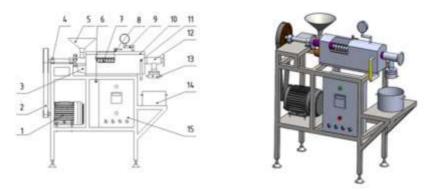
Schematic diagram of the proposed machine 1-Electric motor, 2-Belt drive, 3-Heating resistor, 4-Bearing housing, 5-Rice powder feeder, 6-Water outlet, 7-Screw shaft, 8-Water inlet, 9-Temperature gauge, 10-Water tank, 11-Water level indicator, 12-Cylinder's cover, 13-Mold, 14-Production tank, 15-Electric box.
